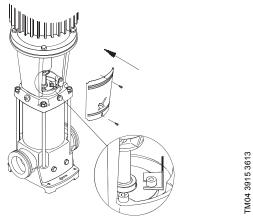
Adjusting fork storage CR, CRN 32, 45, 64, 90, 120, and 150
